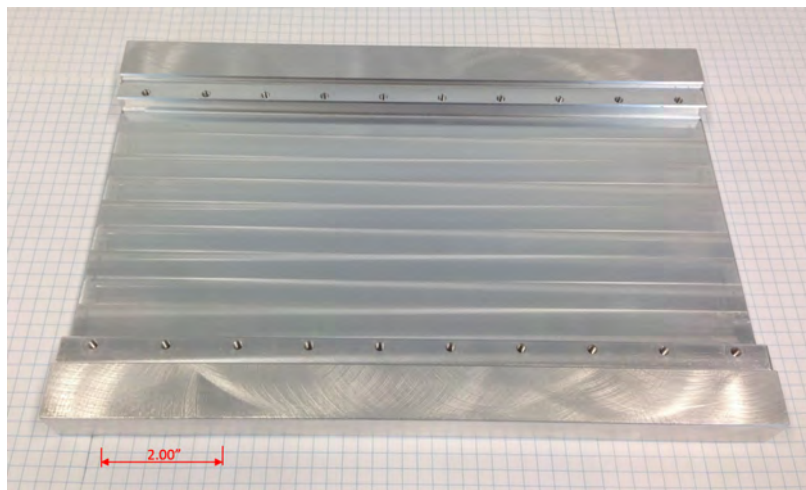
Fixture used for securing the build plate of the large samples while CNC milling operations were performed to remove sections of the build plate from the composite.
